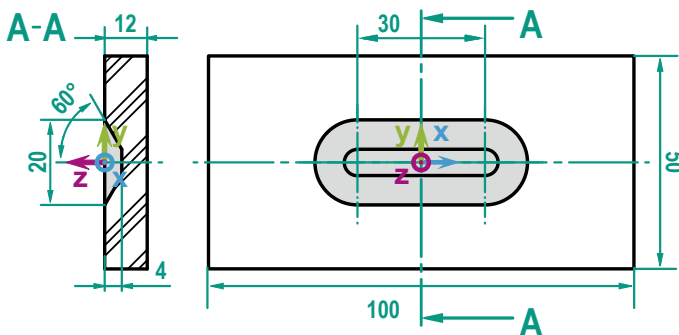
Technical drawing of the sample geometry with a specimen coordinate system. All dimensions are given in mm
